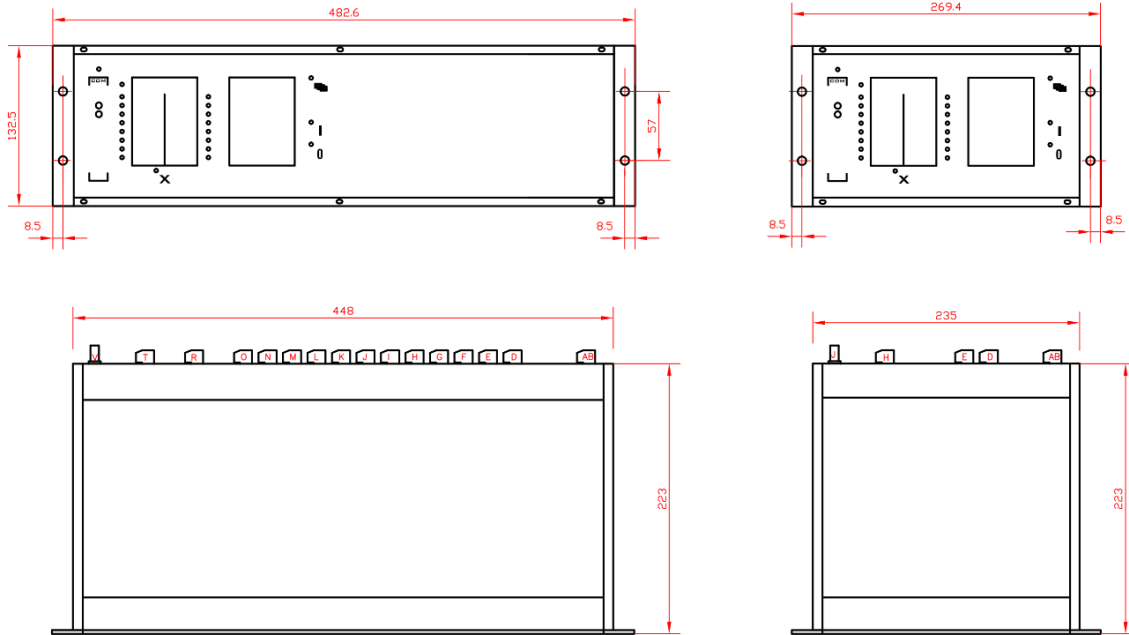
Dimensions for rack mounting of 84 HP and 42 HP single rack
